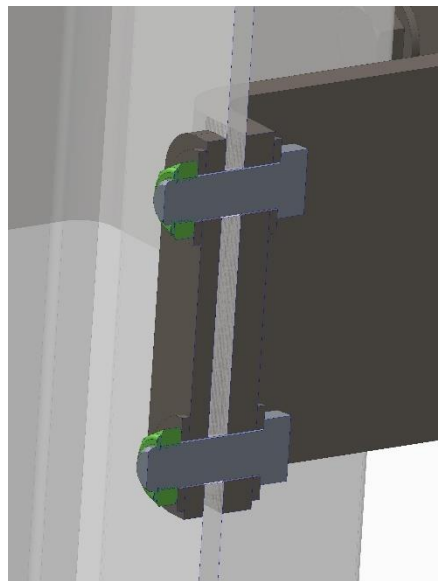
Bracket mounted to pallet wall door with sandwich plate on opposite side.
